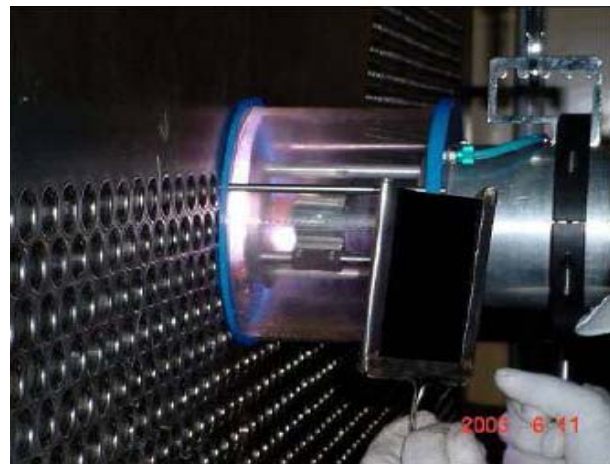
Automatic Welding of Condenser Tubes (Source: IAEA, 2009)
